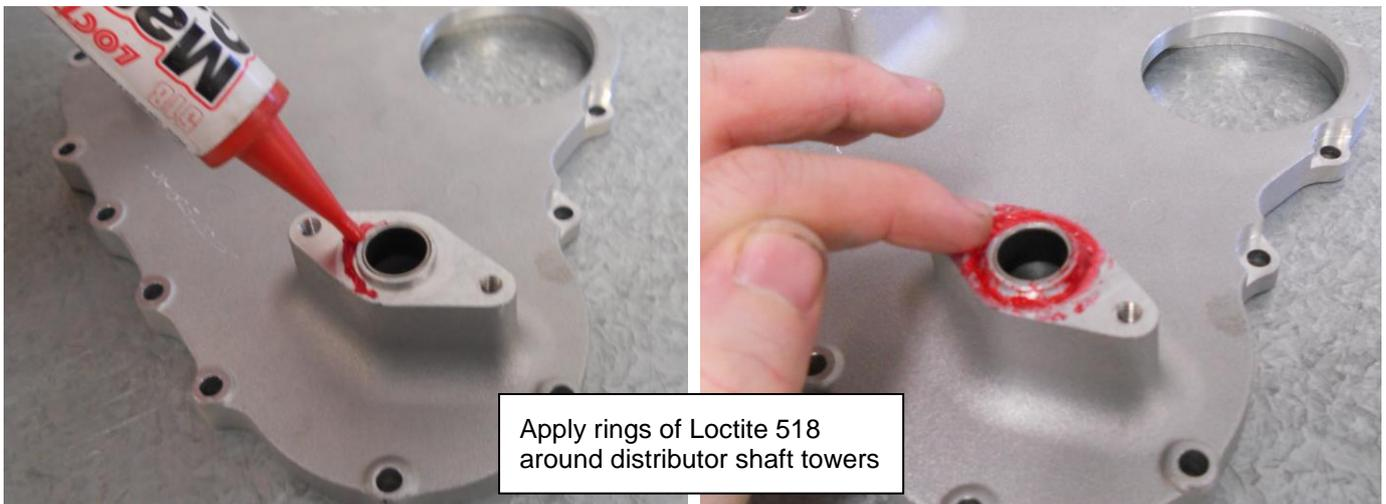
2200/3300 Distributor gearbox subassembly 3
